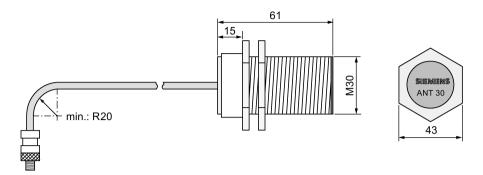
Dimension drawing ANT 30 (all values in mm)
